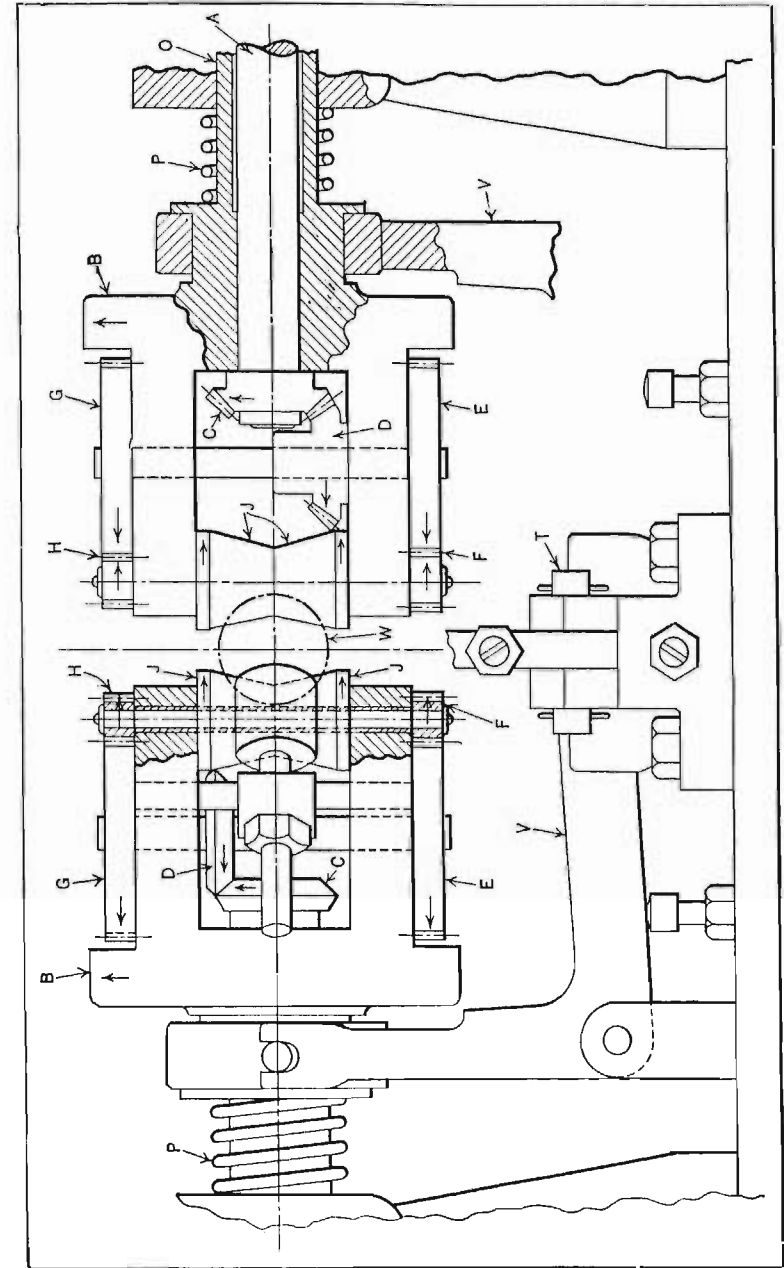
Mechanism for Winding Thin Rubber Band Evenly over the Surface of a Small Spherical Center of Rubber
